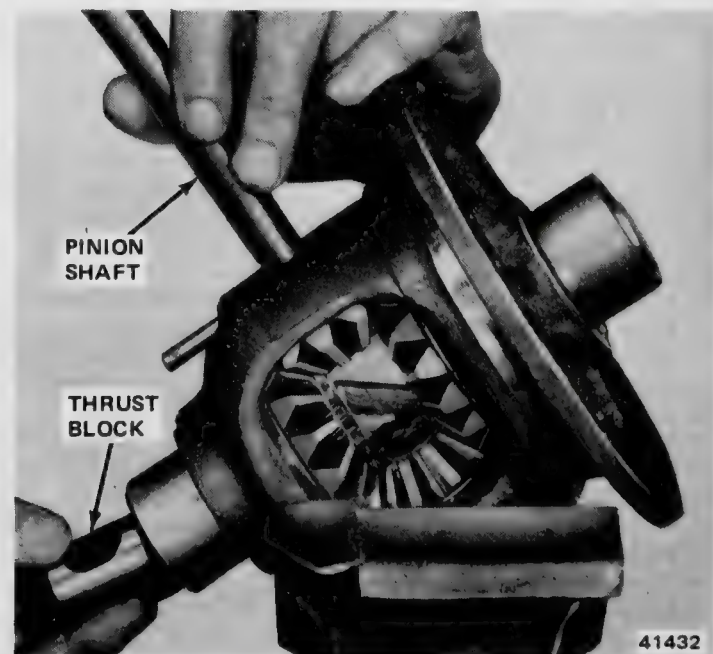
E-18 Pinion Shaft and Thrust Block Removal
